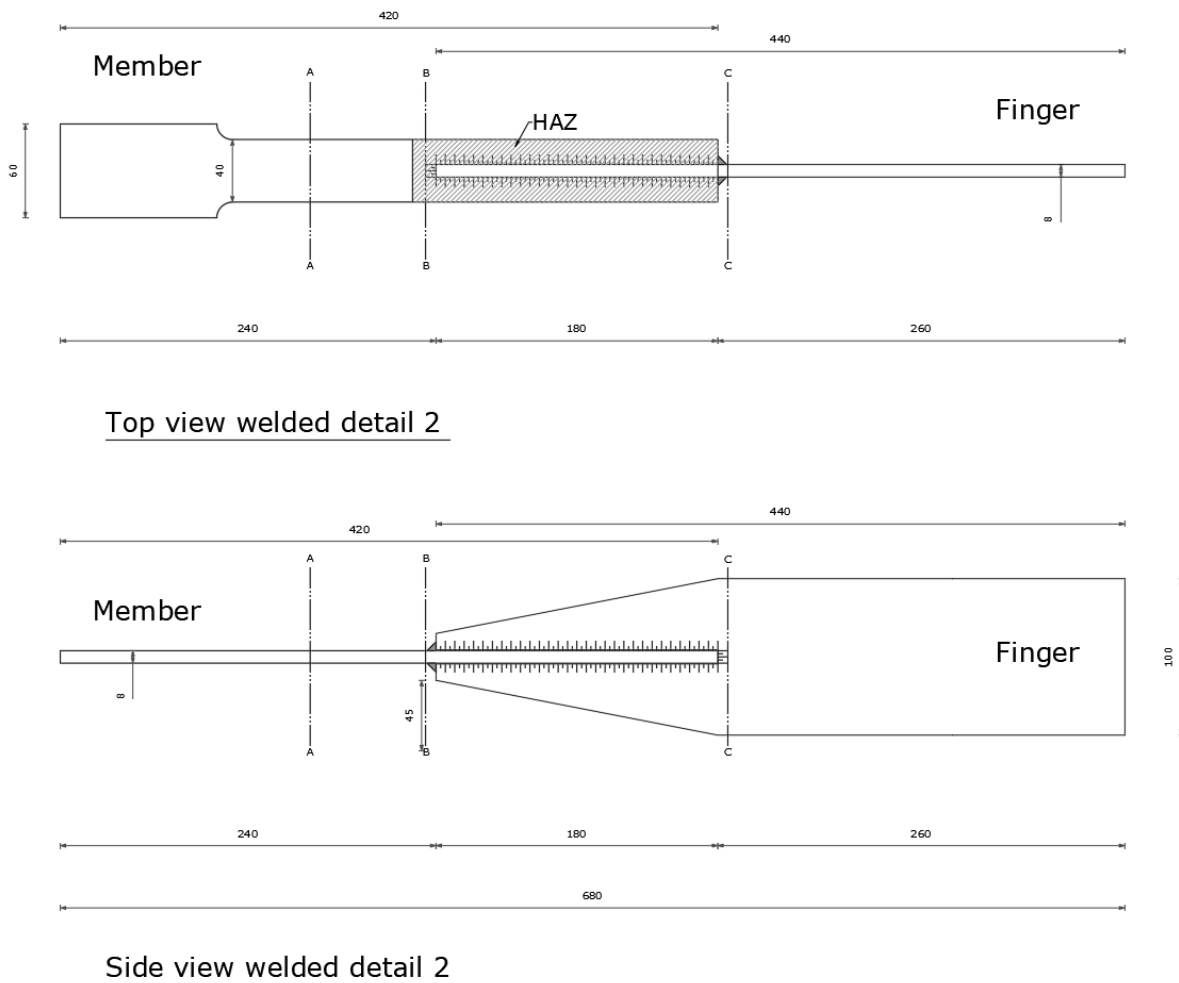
Dimensions of welded cruciform variant 2.
